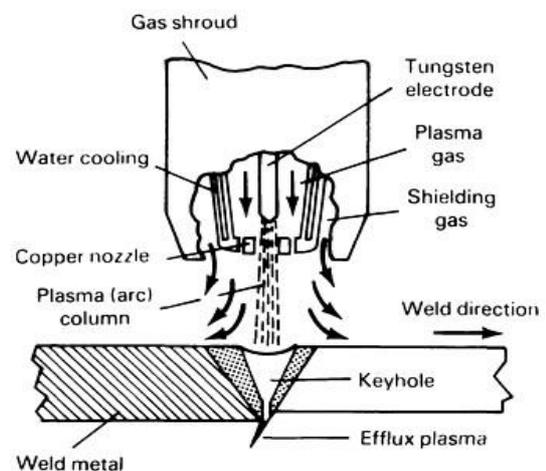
Plasma arc welding process, showing constriction of the arc by a copper
